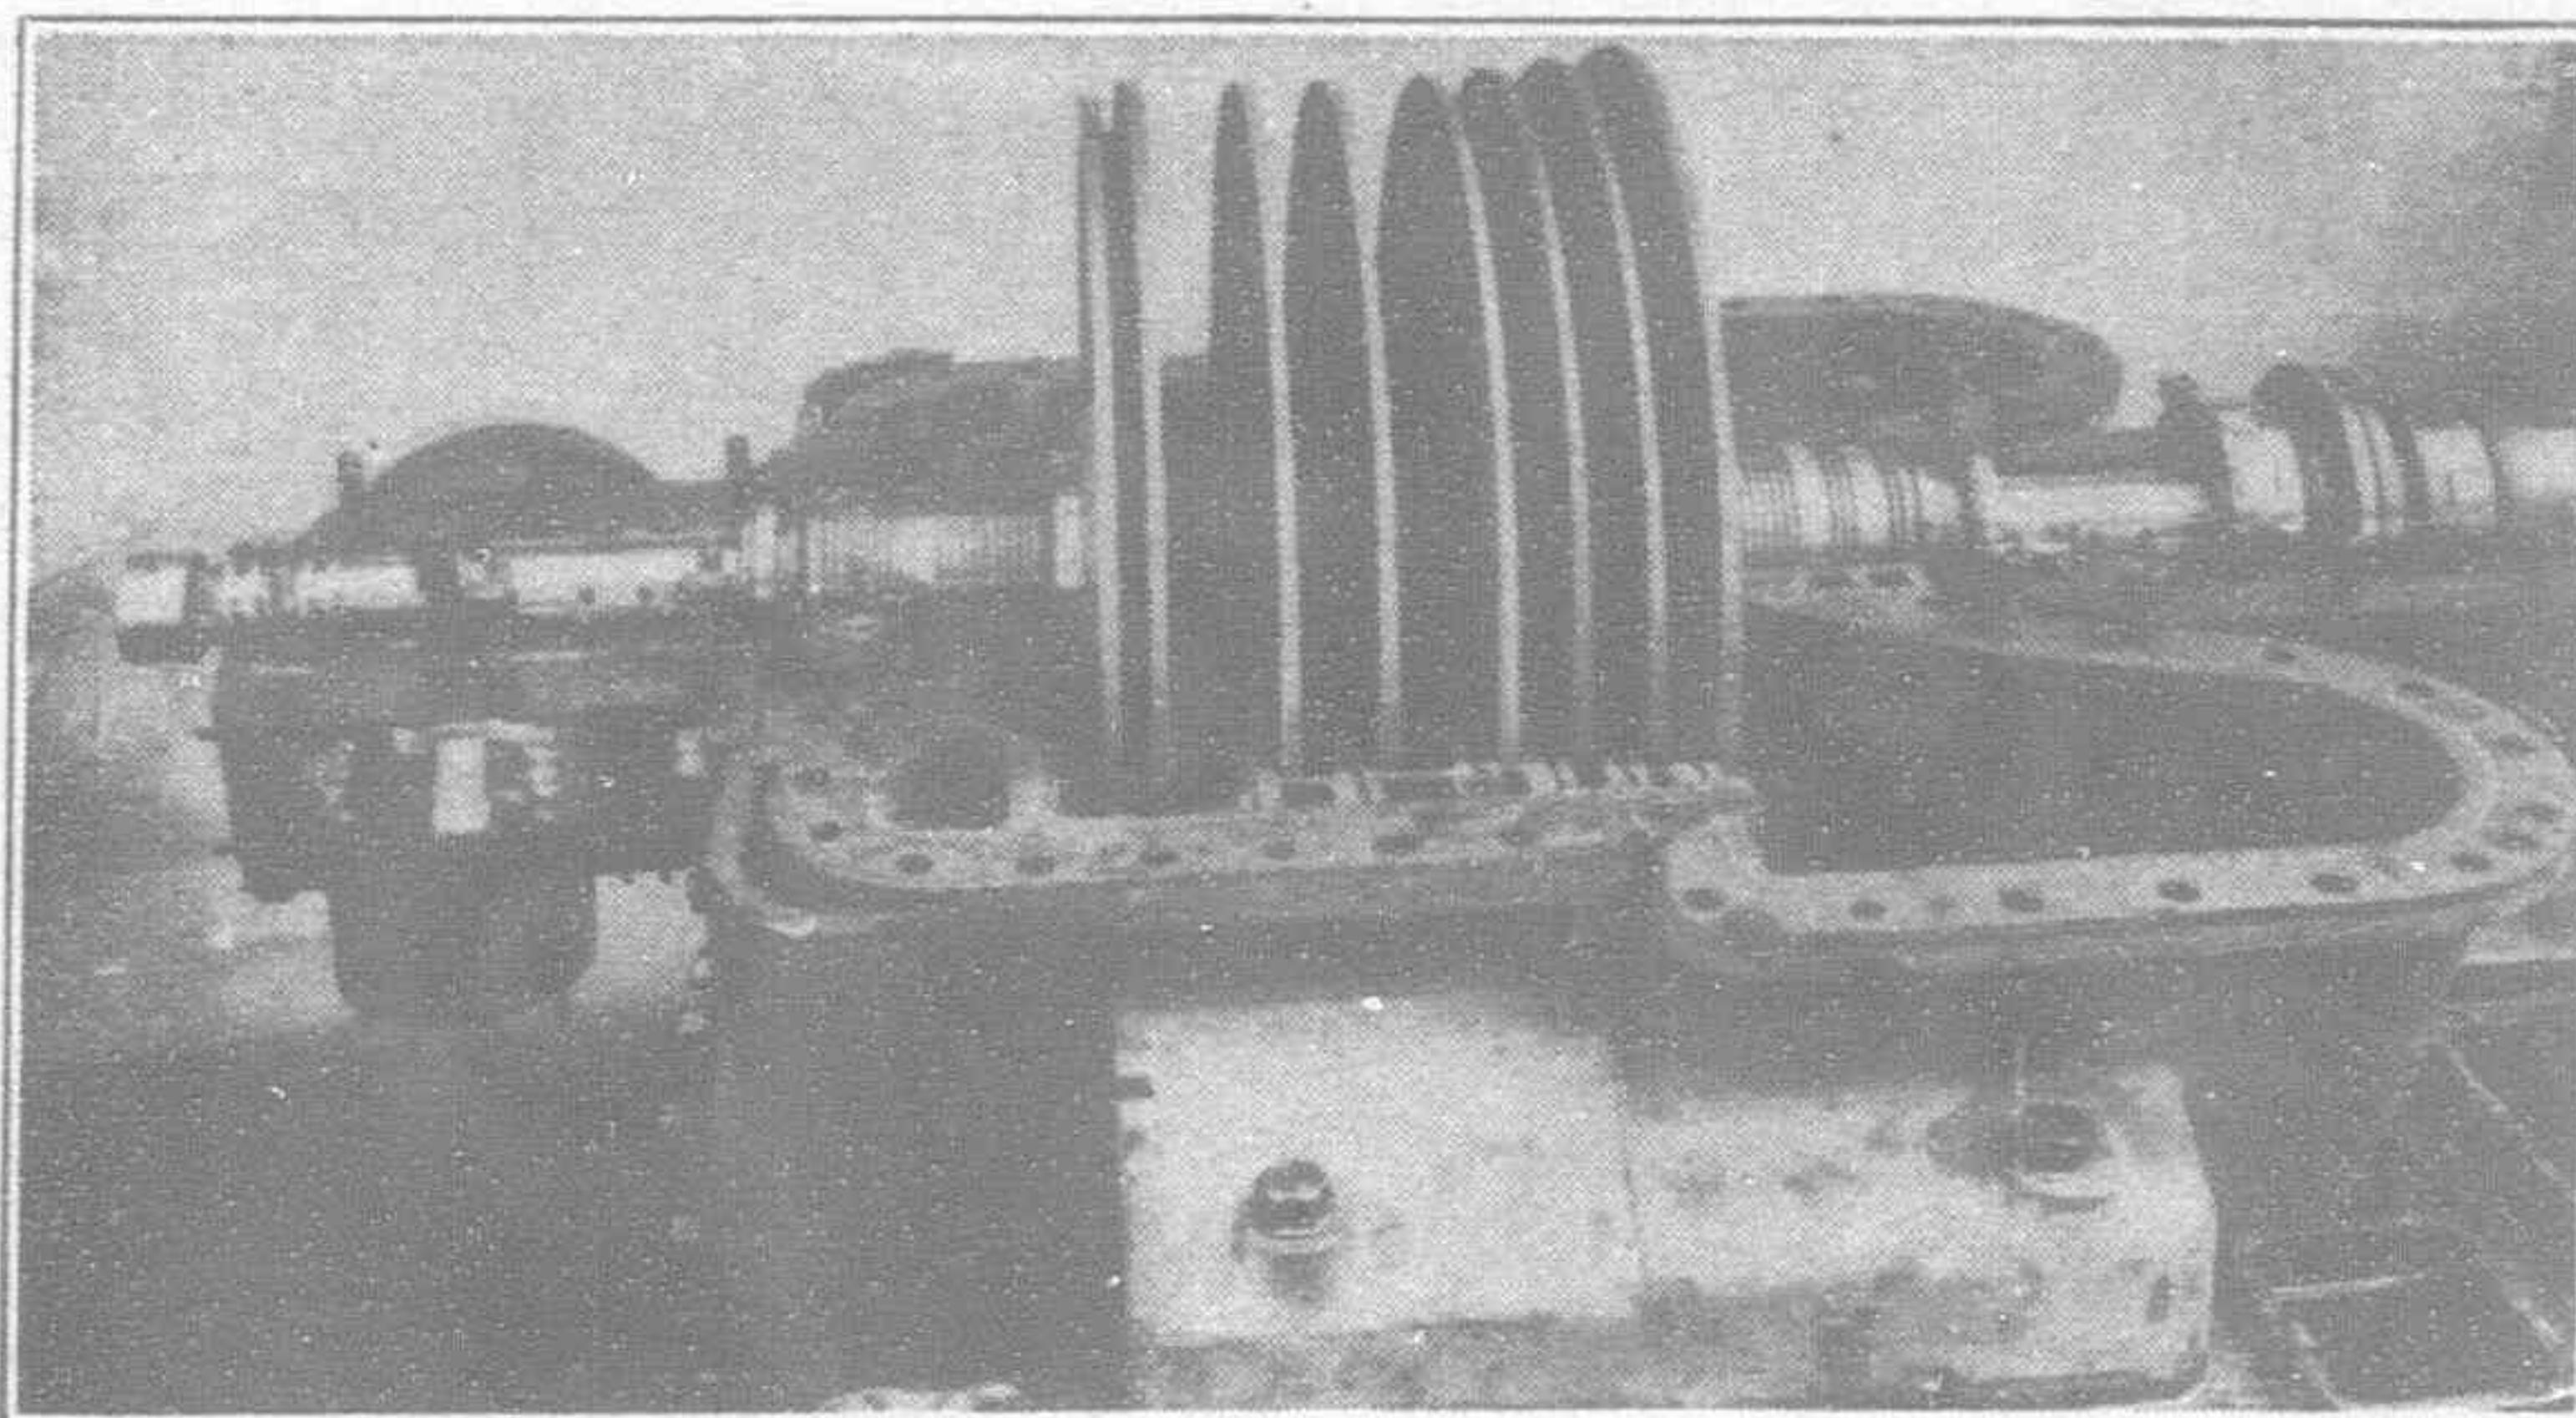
Top Half of Turbine Casing Removed Showing Rotors
